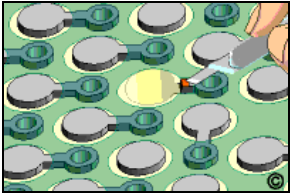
Remove the defective BGA pad and soldermask from the connecting circuit.
